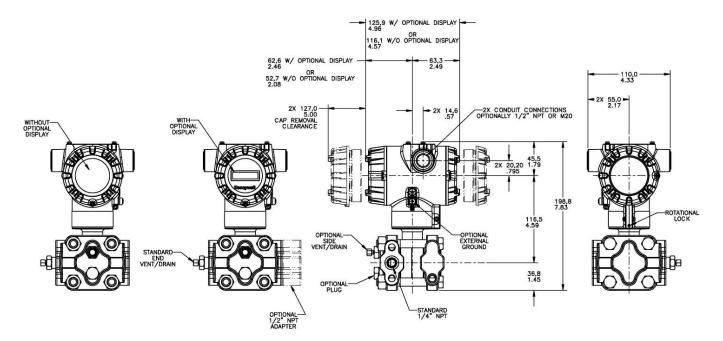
Typical mounting dimensions of STD720, STD730 & STD770 for reference only
